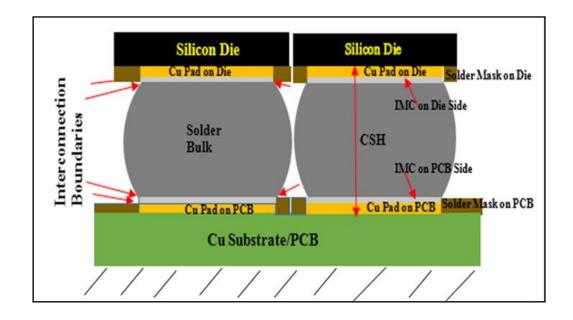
Part of the BGA169 assembly technology used for the investigation trial
